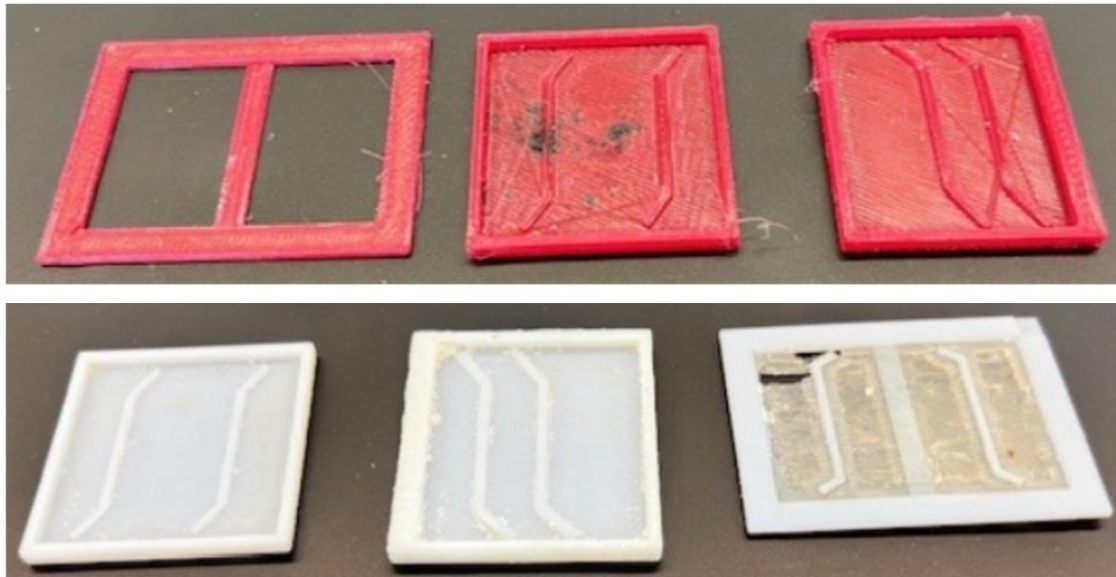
Top – Molds Printed with CraftBotXL. Bottom – Early Molds Printed with Connex Objet 260.
